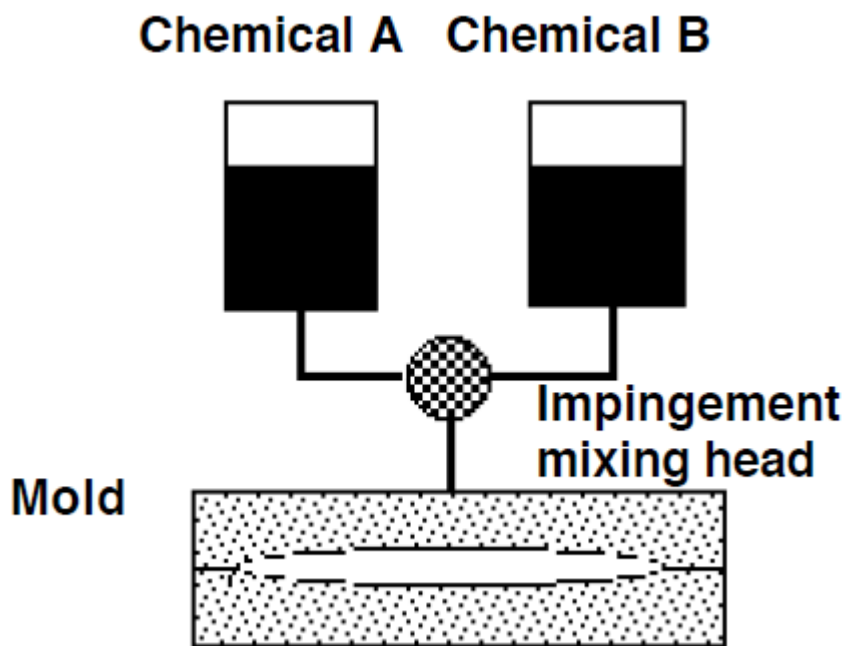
Schematic diagram of a reaction injection molding machine.
